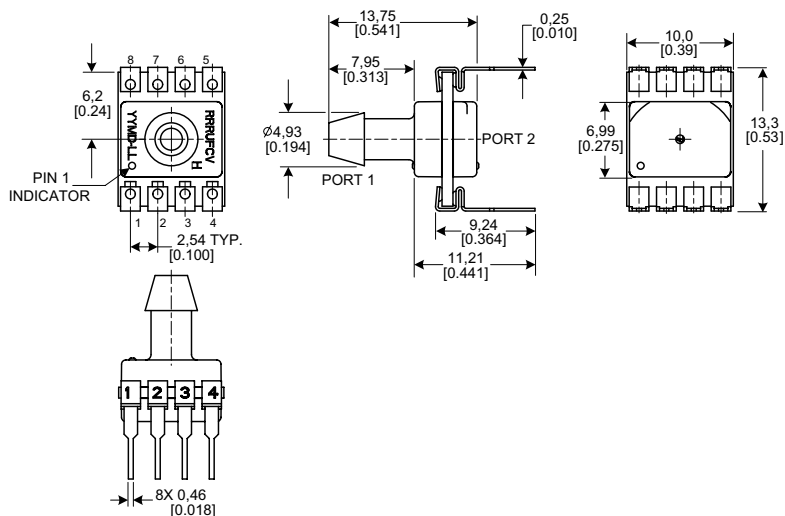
DIP Package Dimensional Drawings (For reference only: mm [in])
